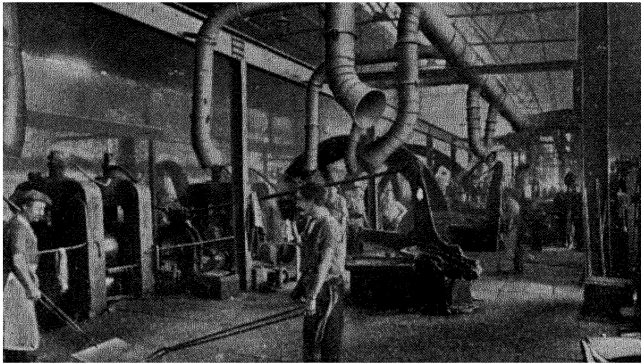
ROLLING MILL AT TINPLATE WORKS.
